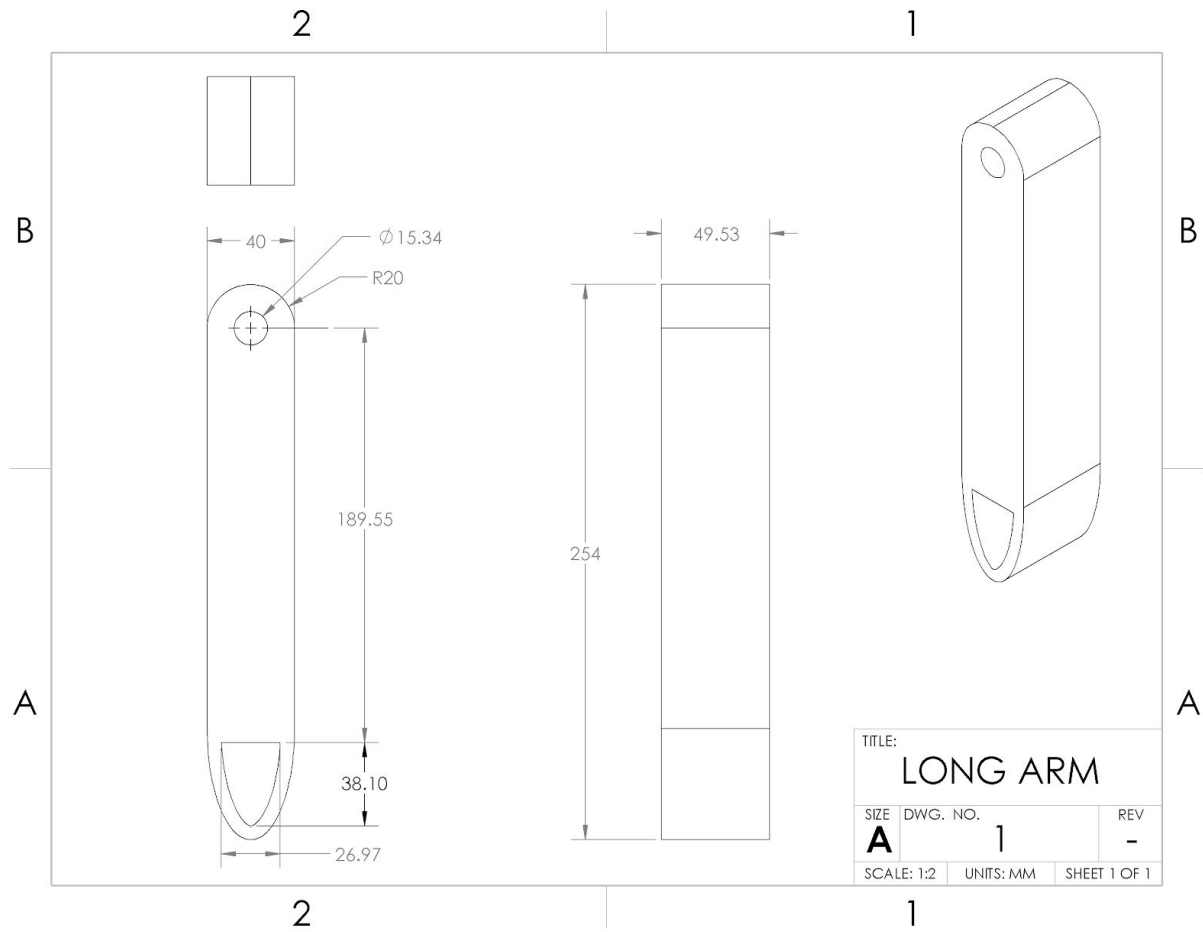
Engineering drawing of the long arm connecting to the weight of user
